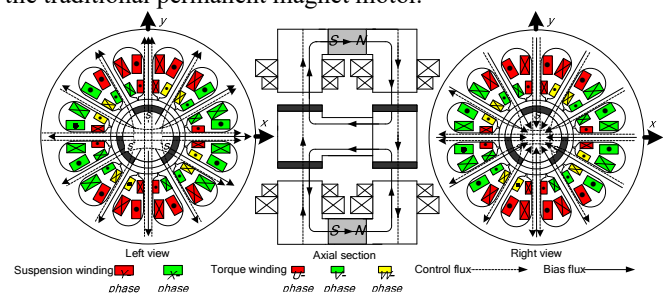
Basic structure, windings arrangement and magnetic path of HPMTBM.
